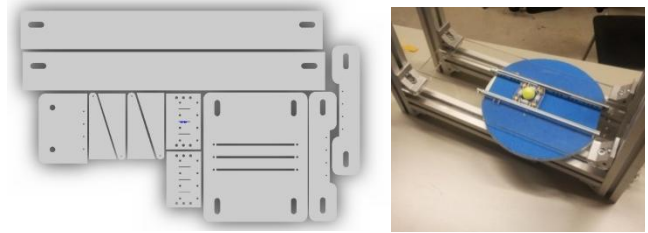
Here at the top we see the mounting plates that keeps the cage which holds the ball between the top and bottom disc in place. The bottom shows the mounting plate for the actuators which is placed below the slide to move the system. The other parts which got tiny holes in them are there for the springs that act as a proportional controller to keep the ball cage in place.
